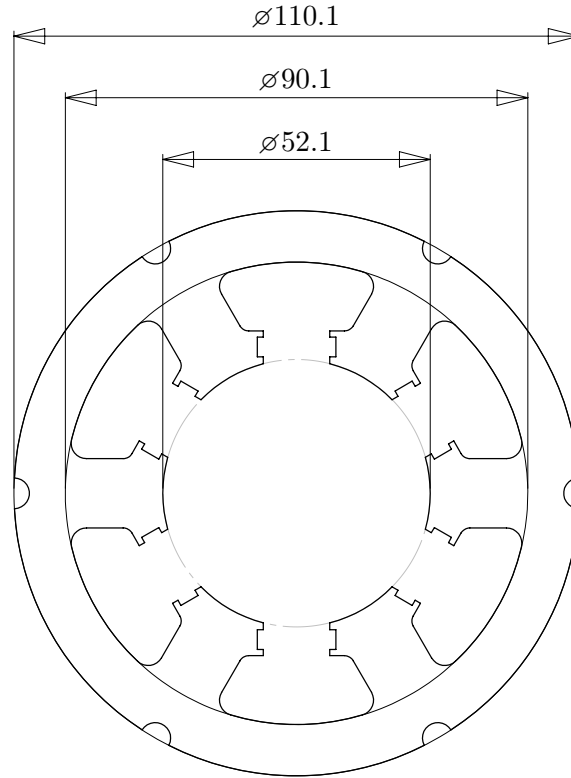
Dimensions of the switch reluctance motor sheets used for radial bearings.
